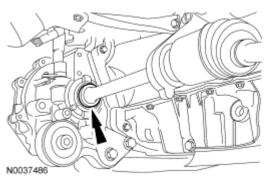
Locating RH Halfshaft Into Transaxle Courtesy of FORD MOTOR CO.
